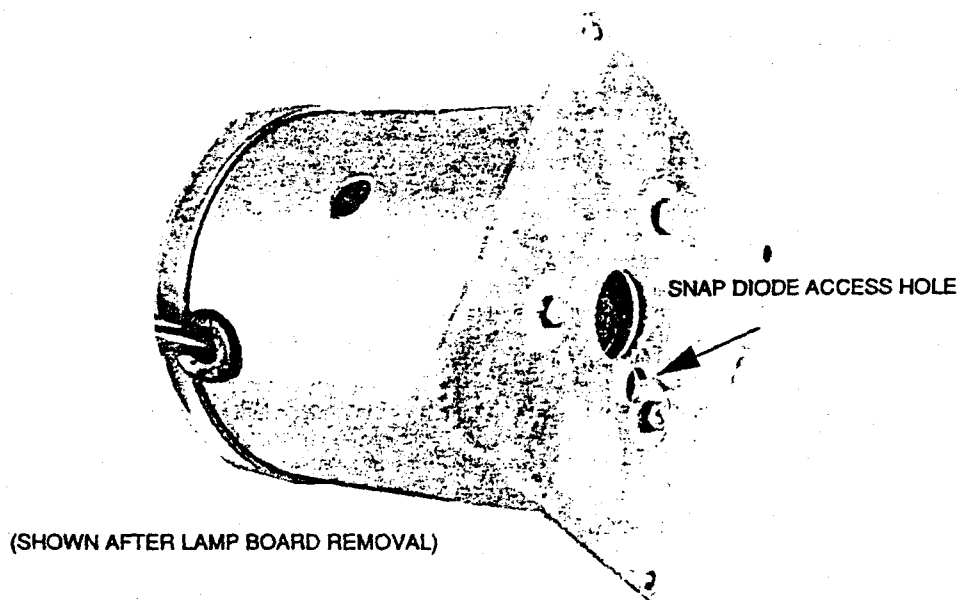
Snap Diode Access Hole on Resonator Assembly
